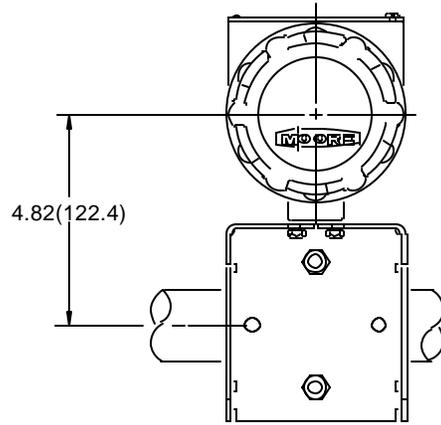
Dimensions, Mounting Bracket for Model 344
